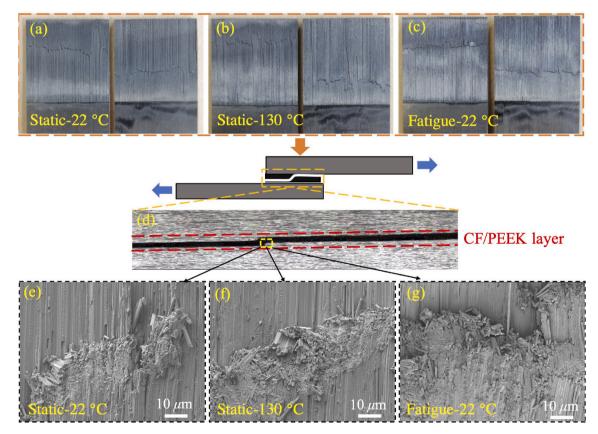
Photographs and microscopy images of the failure surfaces of the single-lap joint specimens: (a)–(c) photographs of the failure surfaces, (d) a typical side-view image of the tested specimens, and (e)–(g) typical SEM images of the failure surfaces.
